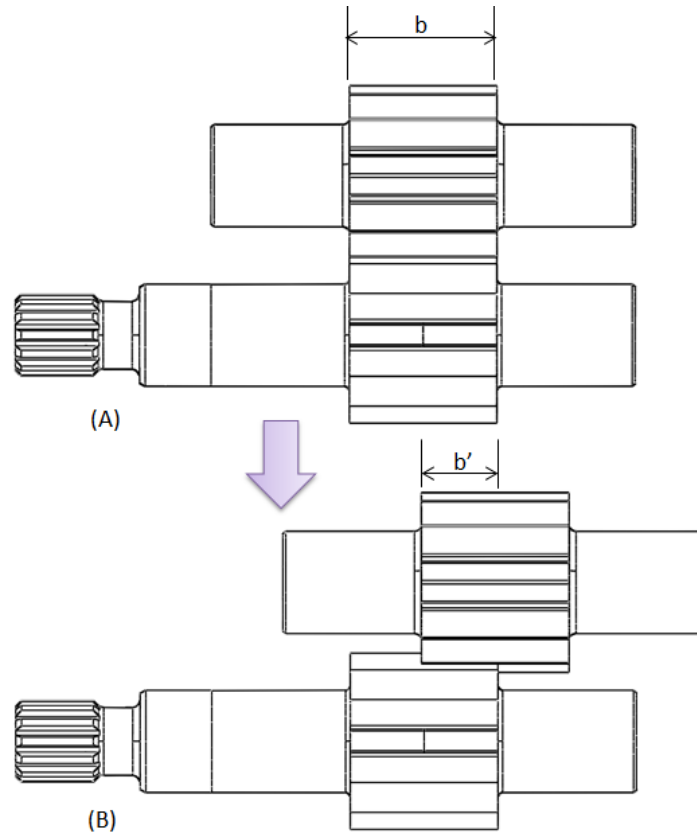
(A) Gears meshing the entire facewidth, b , achieving max displacement; (B) Gears meshing only a fraction of the facewidth, b' , achieving partial displacement.
